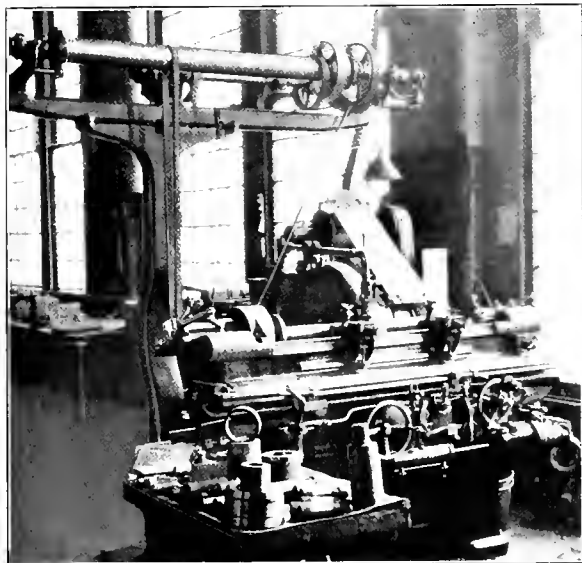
Grinding Screw Reverse Screws—Other Work Done on This Machine Is Shown on the Table in the Foreground
